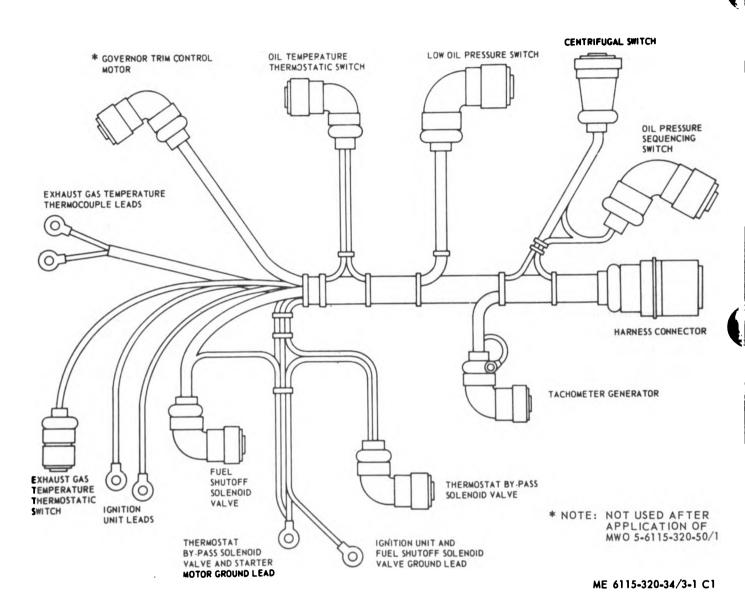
Engine wiring harness identification. (ME 6115-320-34/3-1, C1)
